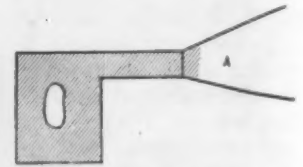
DIE CASTING SHOWING SHRINKAGE-HOLE.
